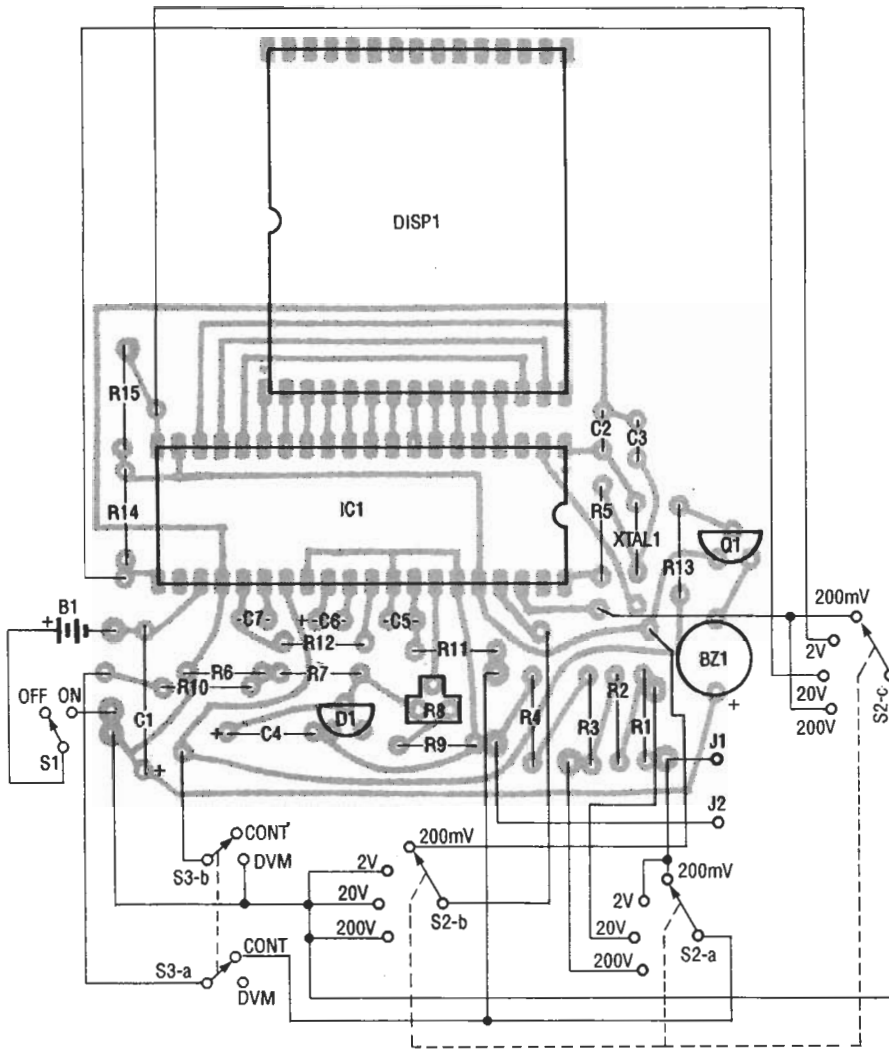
PARTS-PLACEMENT DIAGRAM. Install a socket for IC1, and make two 15-pin SIP sockets for the LCD module from a 40-pin DIP socket.
